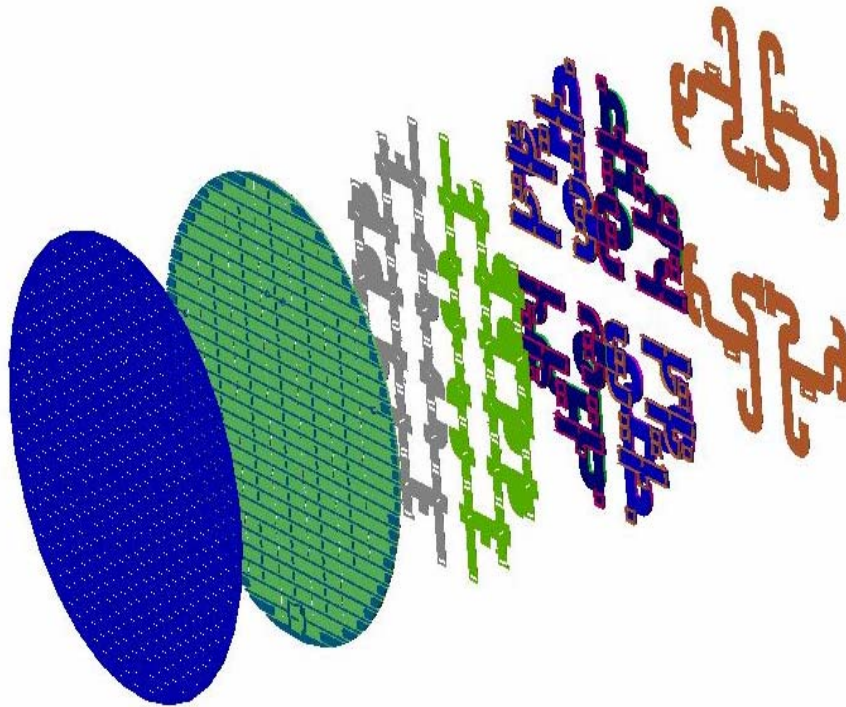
EXPLODED VIEW OF THE SLOTTED ARRAY ANTENNA ASSEMBLY
